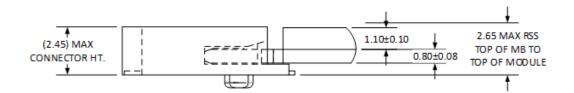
H2.5-S1 - Stack-up Top Mount Single-sided Module for 1.20 Maximum Top-side Component Height and with Higher Clearance above Motherboard
